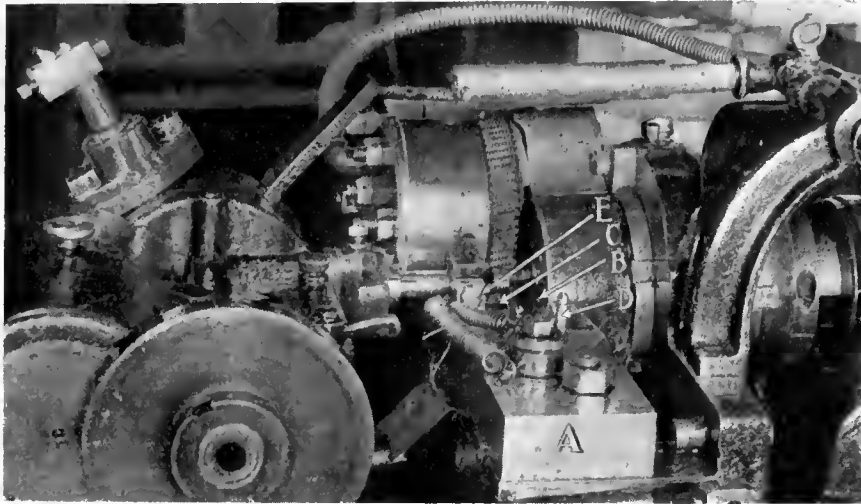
LOCATING AND THREAD MILLING ATTACHMENTS.
